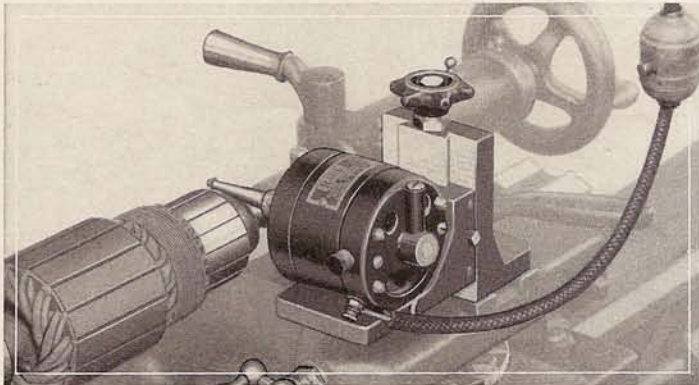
A Rotary Electric Mica Undercutting Attachment Mounted on the Compound Rest of a No. 22—9-inch Junior Lathe
